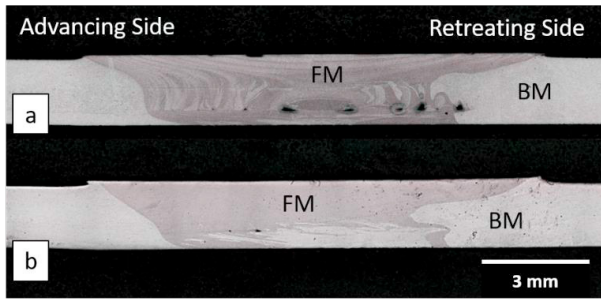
Optical macrographs of the transverse cross-section at two different locations along the weld; (a) Start position, (b) Central part of weld.
